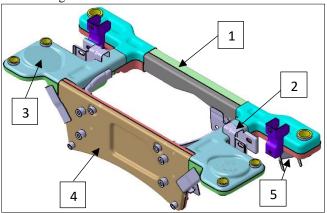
Cross Member - (1) Front Member, (2) UCA Bracket, (3) Spring Seat, (4) Rear Member, (5) LCA FRT Bracket
